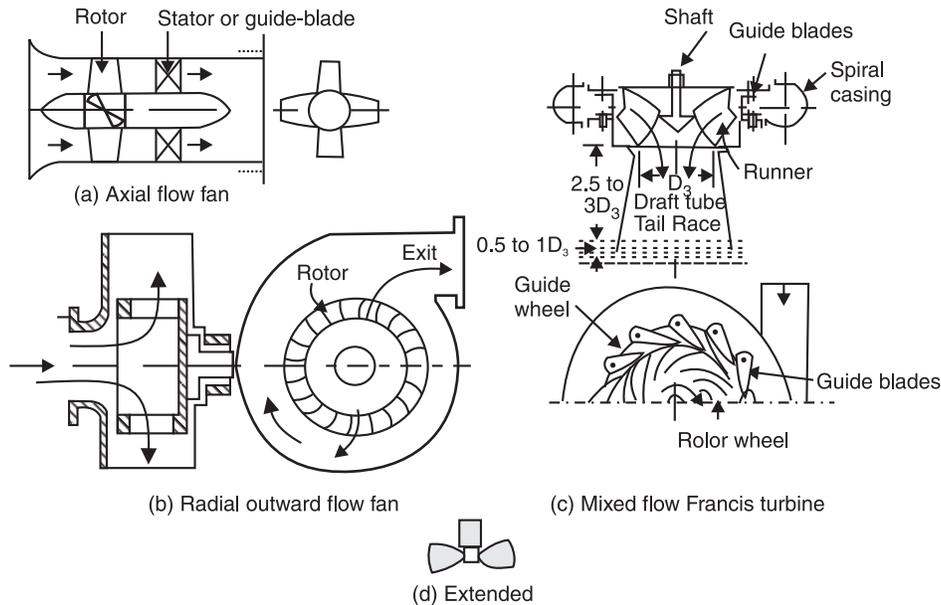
Schematic cross-sectional view of a turbine showing the principal parts of the turbomachine.
